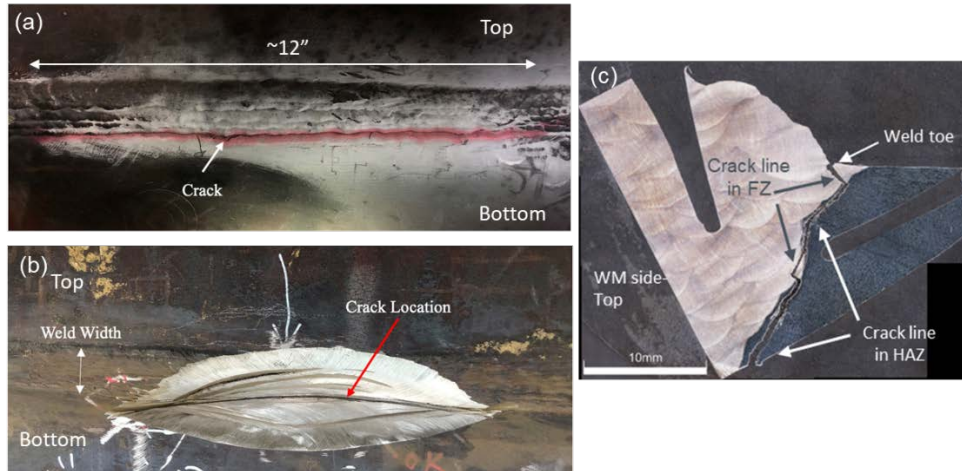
Wall crack and sample extraction for failure analysis. (a) 12-inch long through-thickness crack in the HAZ/PMZ of the weld as seen from the ID of the hot salt tank; highlighted in red using dye-penetrant testing, (b) excavated boat sample site on the OD of the tank wall containing the crack that was examined, and (c) cross section of weld showing crack path along HAZ on bottom side of tank (first wall section ~1.5" thick) on OD.
